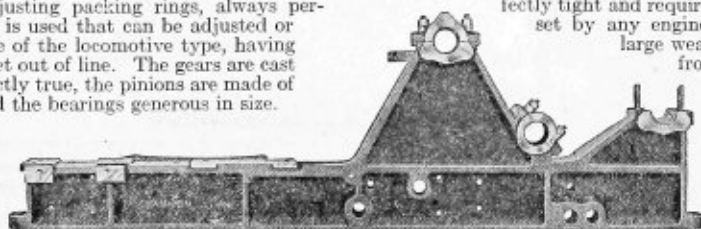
The well known Mundy "One-Piece" Engine Side Frame
